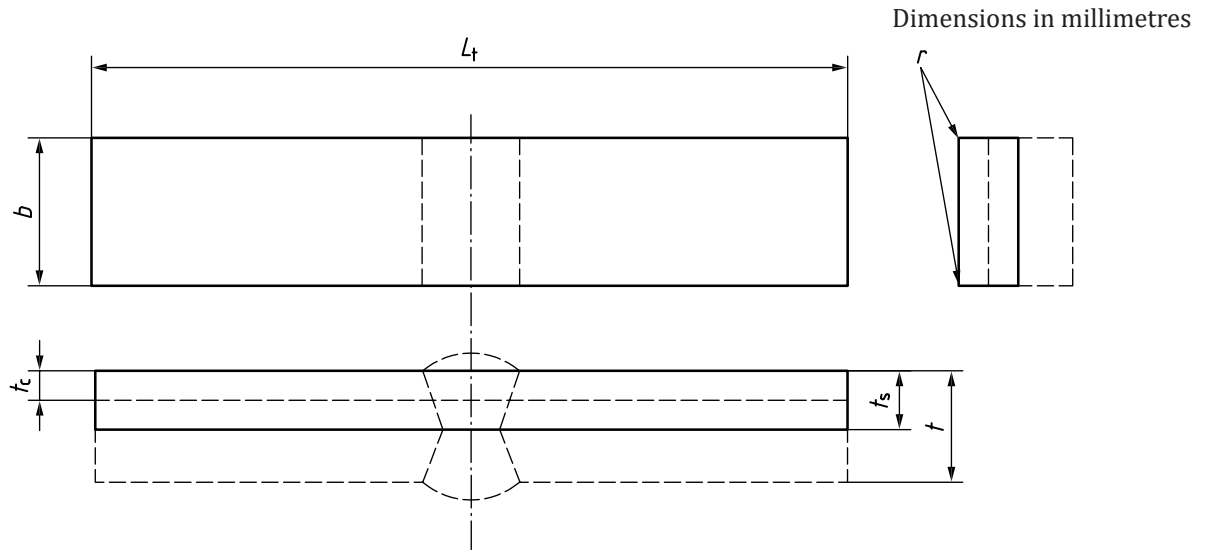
Side bend test specimen for cladding without a butt weld (SBC)
